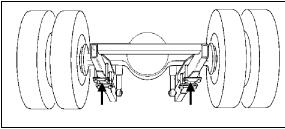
JACKING POINTS ON DRIVE AXLE OEH3B762
